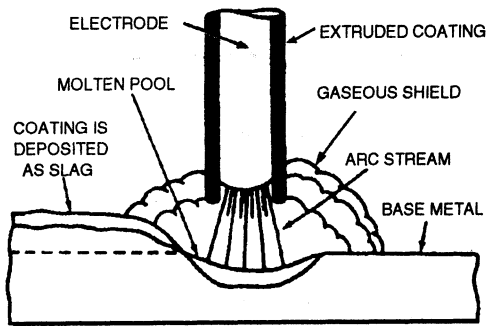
Electrode covering and gaseous shield that protects weld metal from the atmosphere.
